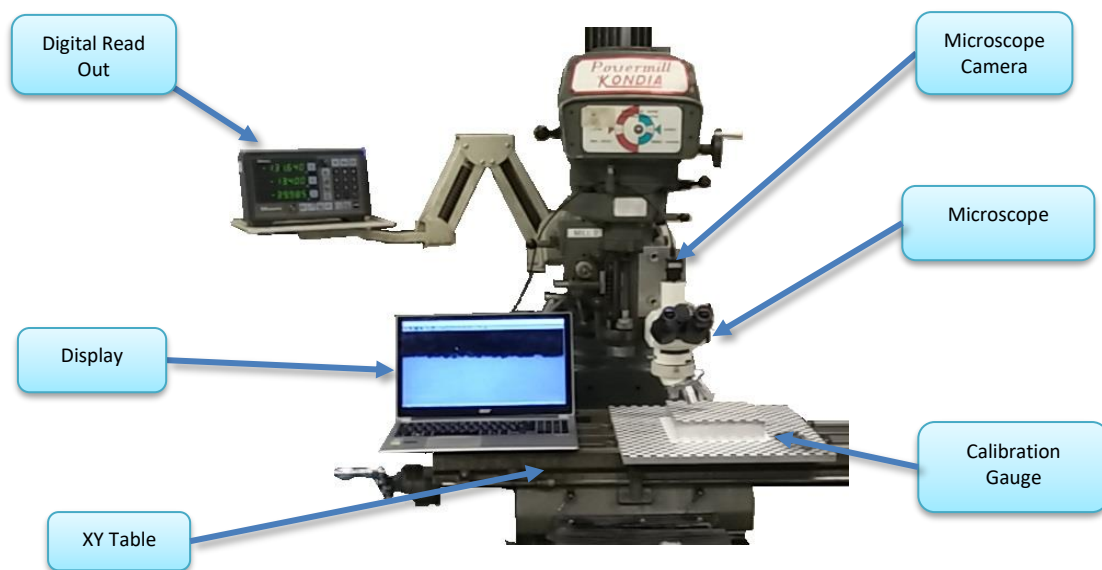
Verification of Accuracy of Calibration Gauge on Milling Machine XY Table
